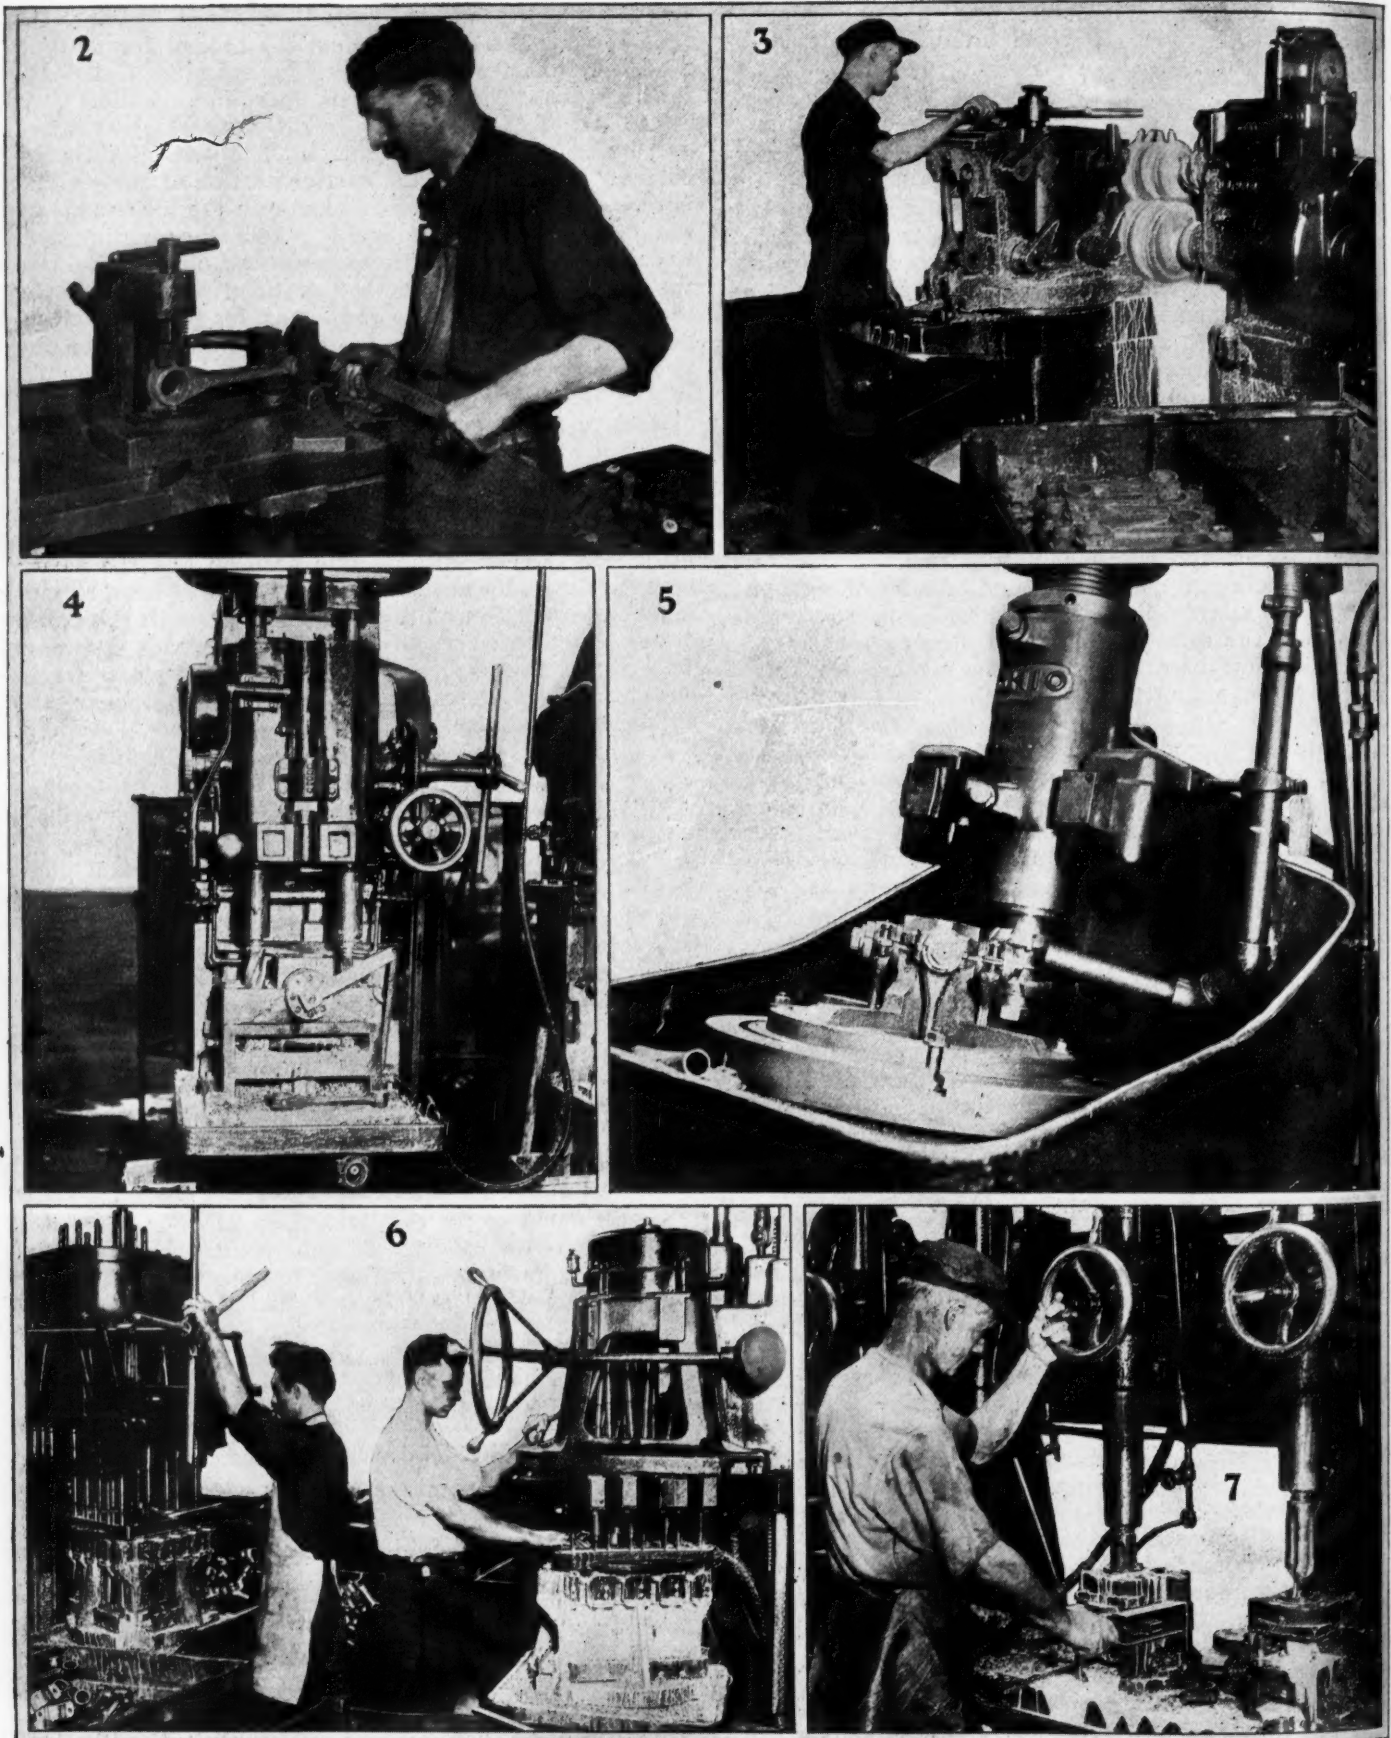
Straightening fixture showing head of rod being set after shank is lined up with floating Vee block. Fig. 3—Capstan double end milling jig. Fig. 4—Double end drilling jig which is closed by a single hand lever. Fig. 5—Progressive sawing and milling fixture. Fig. 6—Bolt holes in rods being drilled in jigs requiring no hand clamping. Fig. 7—Simple jig which locks caps by cam action
